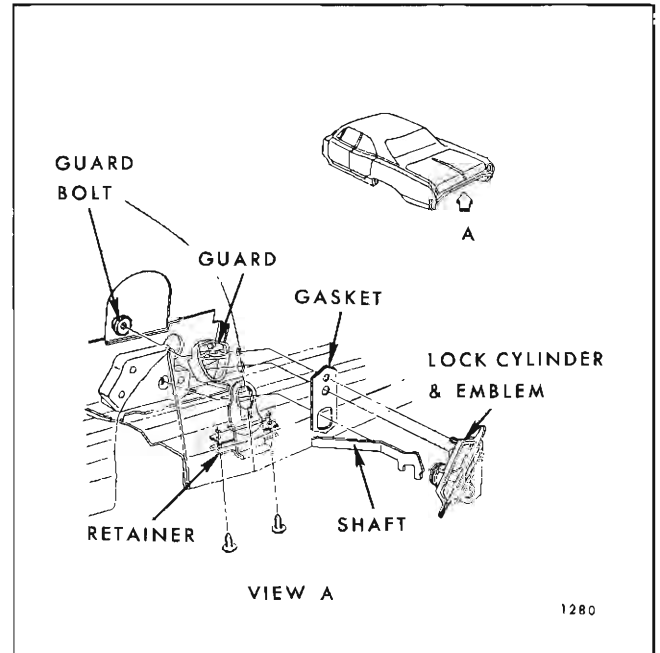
F11—Rear Compartment Lid Lock Cylinder and Emblem Assembly
